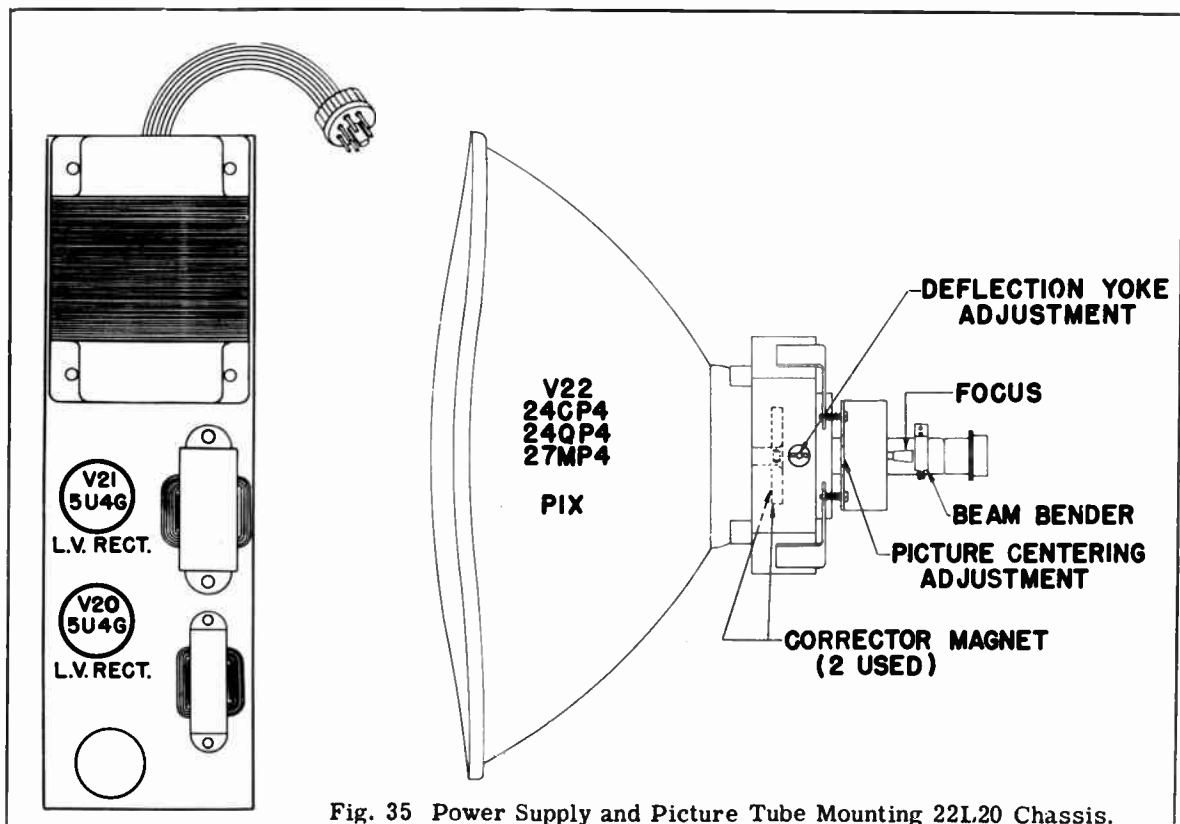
Power Supply and Picture Tube Mounting 22L20 Chassis.
